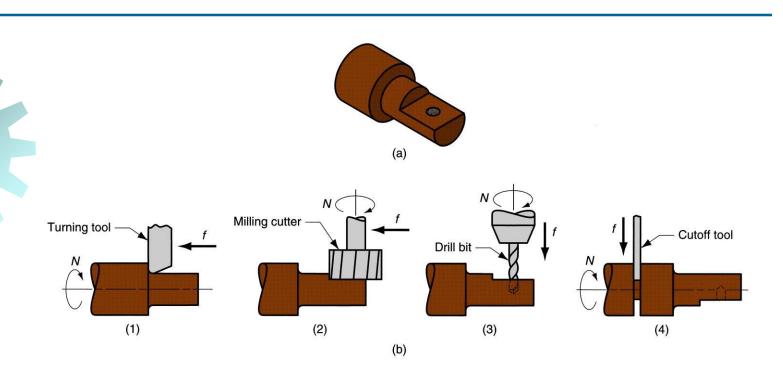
Operation of a mill-turn center: (a) example part with turned, milled, and drilled surfaces; and (b) sequence of operations on a mill-turn center: (1) turn second diameter, (2) mill flat with part in programmed angular position, (3) drill hole with part in same programmed position, and (4) cutoff.
